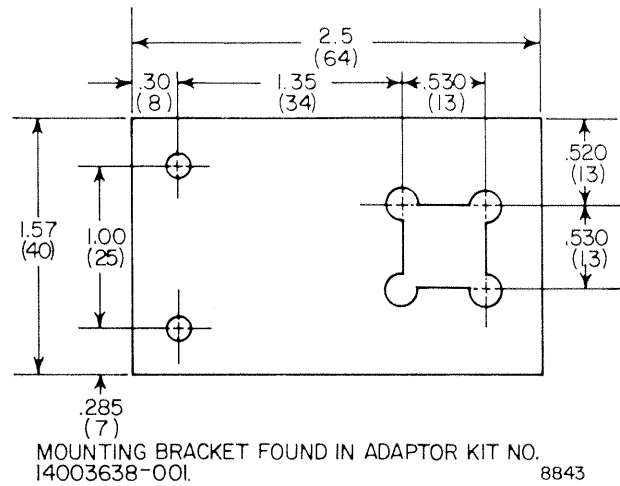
Mounting Bracket Found in Adapter Kit No. 14003638-001 Approximate Dimensions in Inches (Millimeters).
